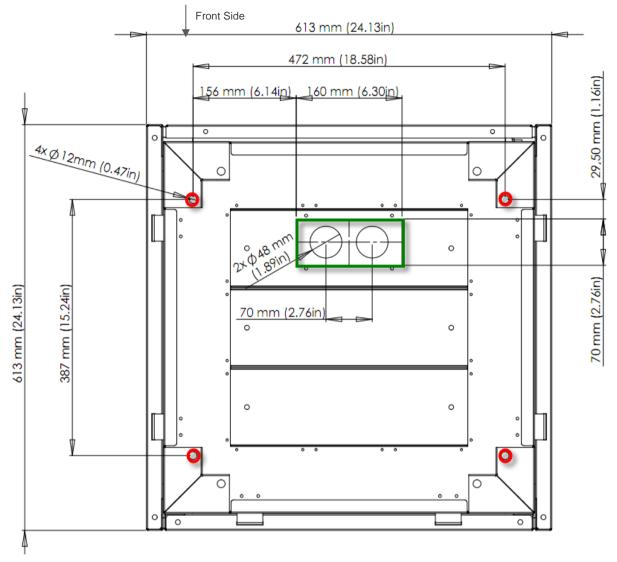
EFAPOWER EV-QC45 Drilling and conduits layout (bottom view)
